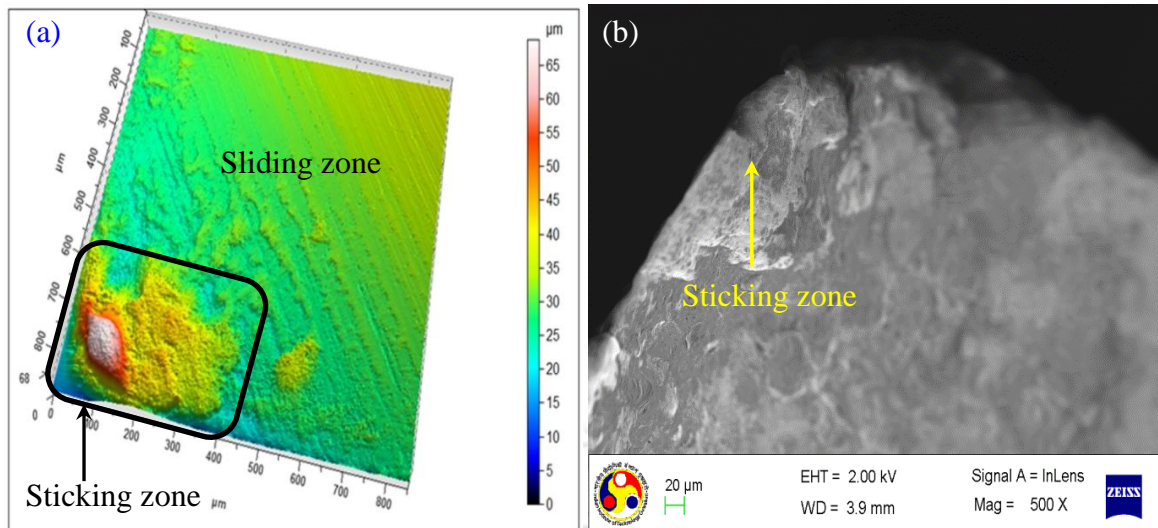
Sticking and sliding zone over rake surface of the un-textured tool after machining (a) 3D surface and (b) surface micrograph showing the sticking zone
